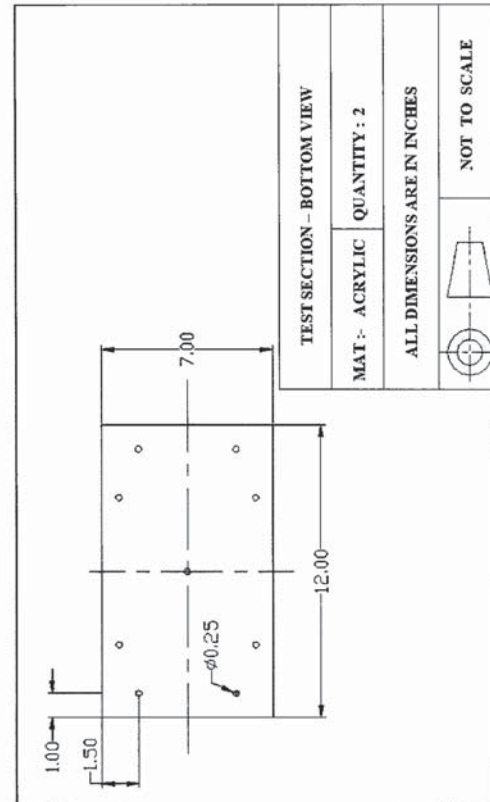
CAD DRAWING OF TEST SECTION - BOTTOM VIEW
